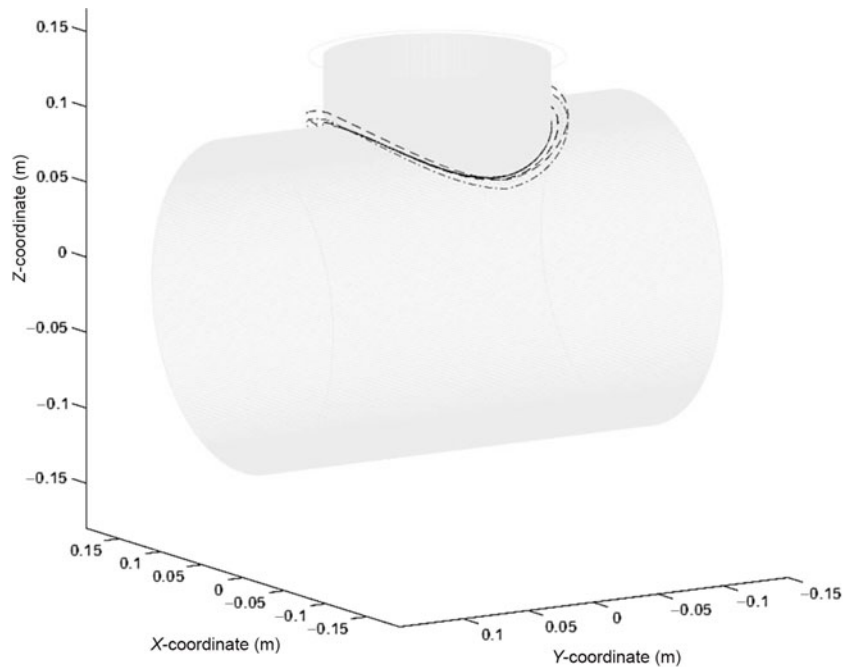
Multi-layer weld path at the pipe intersection.
